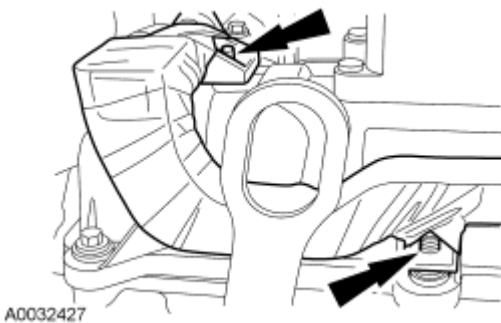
Locating Fuel Injector Electrical Connectors
